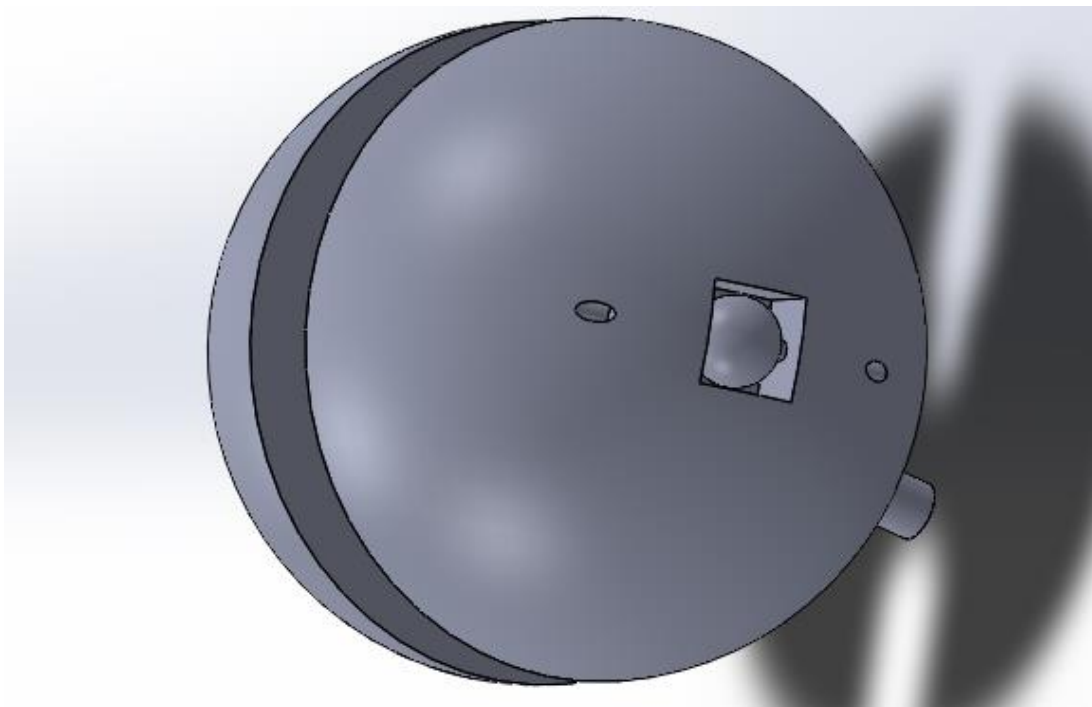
CAD Model of Prototype II of Wheel (Side View)
